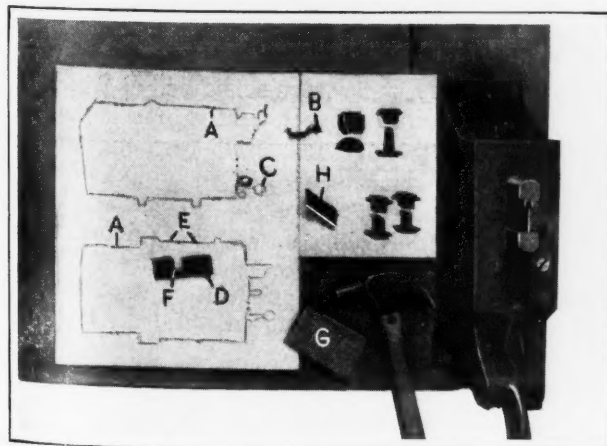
Die Partly Assembled with Steel Cutting Rule—Bending Machine to Right
